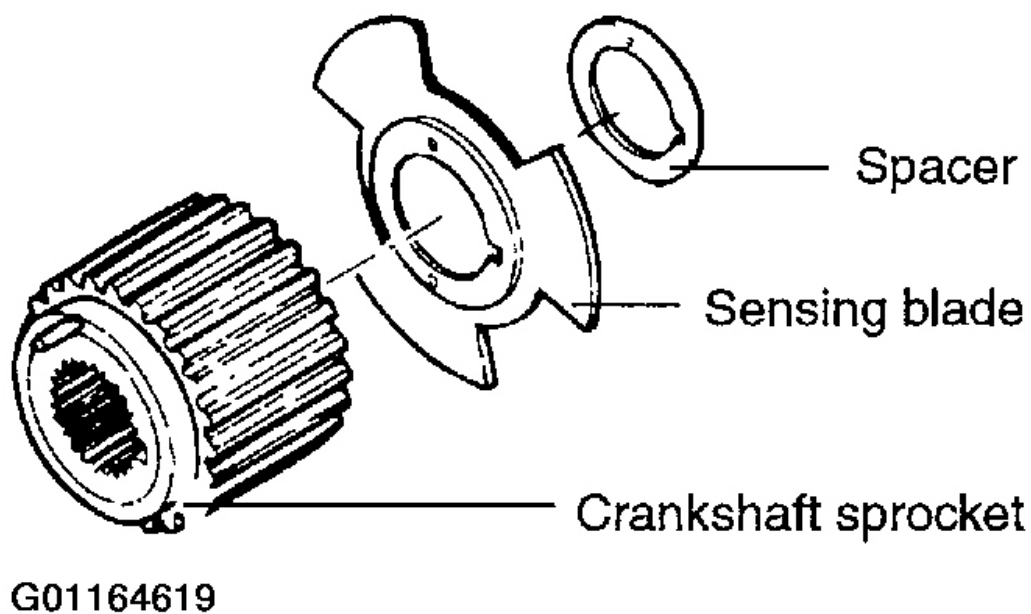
Identifying Crankshaft Sprocket, Sensing Blade & Spacer
